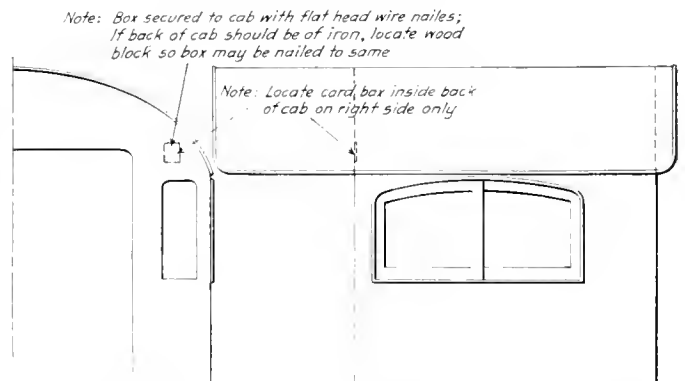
Location in Cab of Box for Holding Boiler Washout Card.
